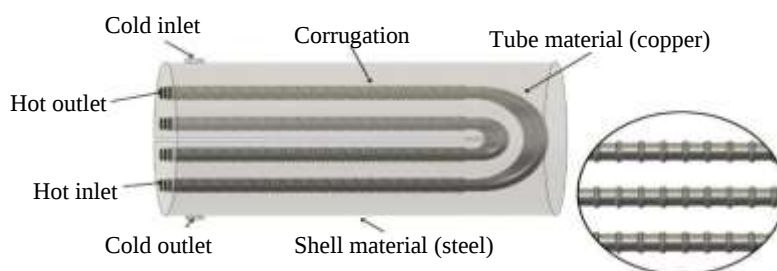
Geometry representation of the U-tube heat exchanger using corrugated tubes.
